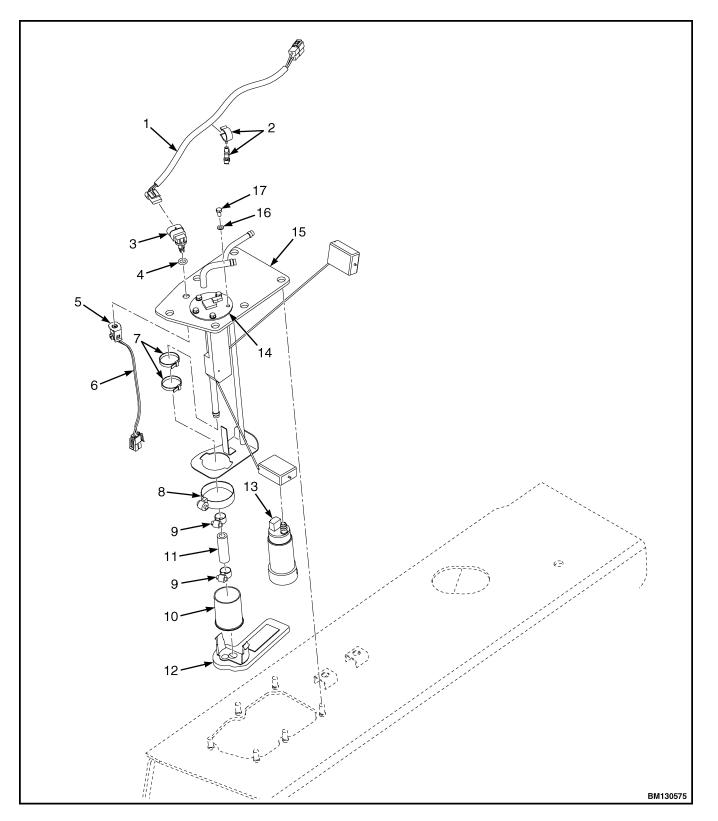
Fuel pump and Attaching Parts - PSI 2.4L Bi-Fuel
